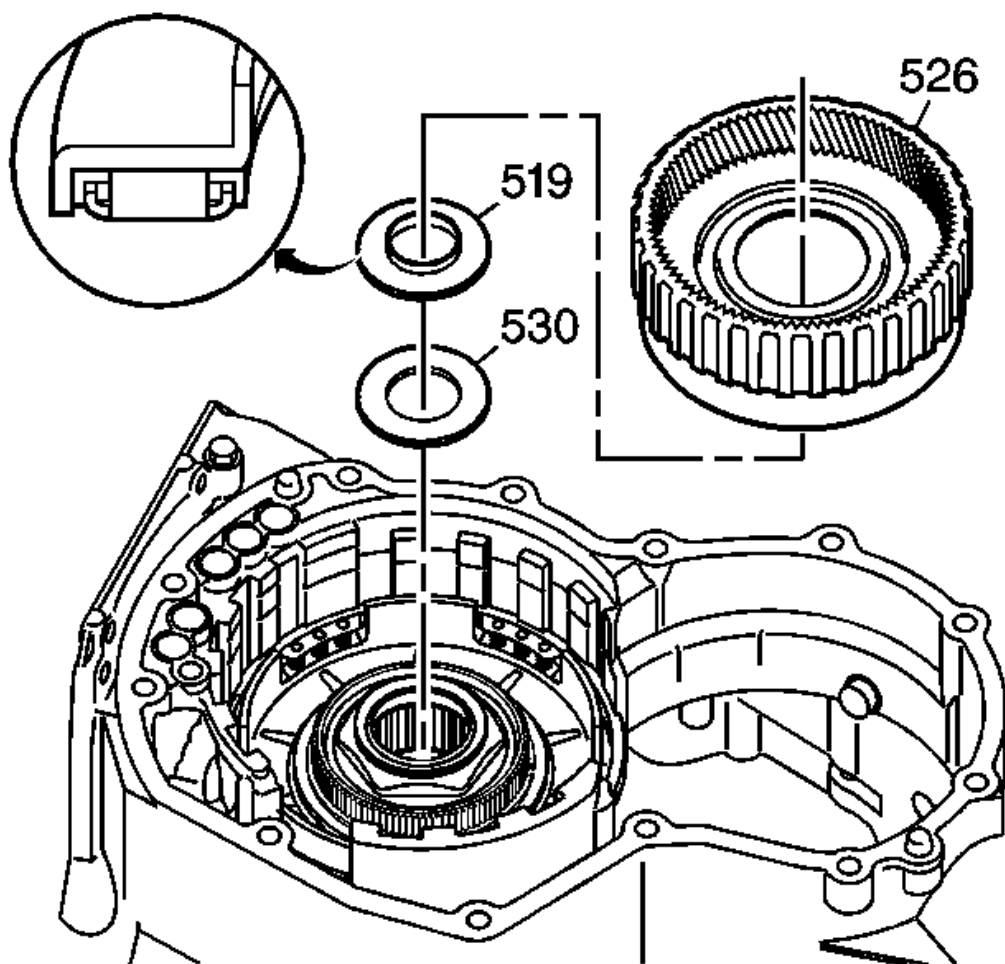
Front Differential Transfer Drive Gear Support - Case Side
